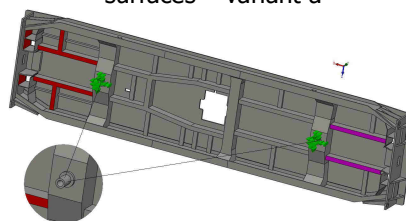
The fixing of the enhanced chassis – on two cylindrical surfaces
